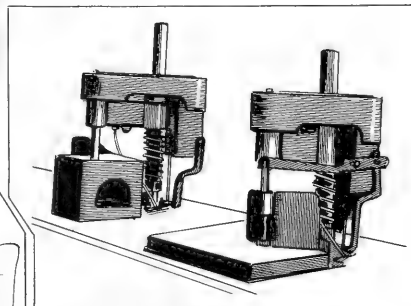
UNITS FOR CUTTING FISH: AT THE RIGHT THE MACHINE FOR CUTTING THE ANAL PORTION; AT THE LEFT, THE MACHINE FOR CUTTING THE HEAD.
